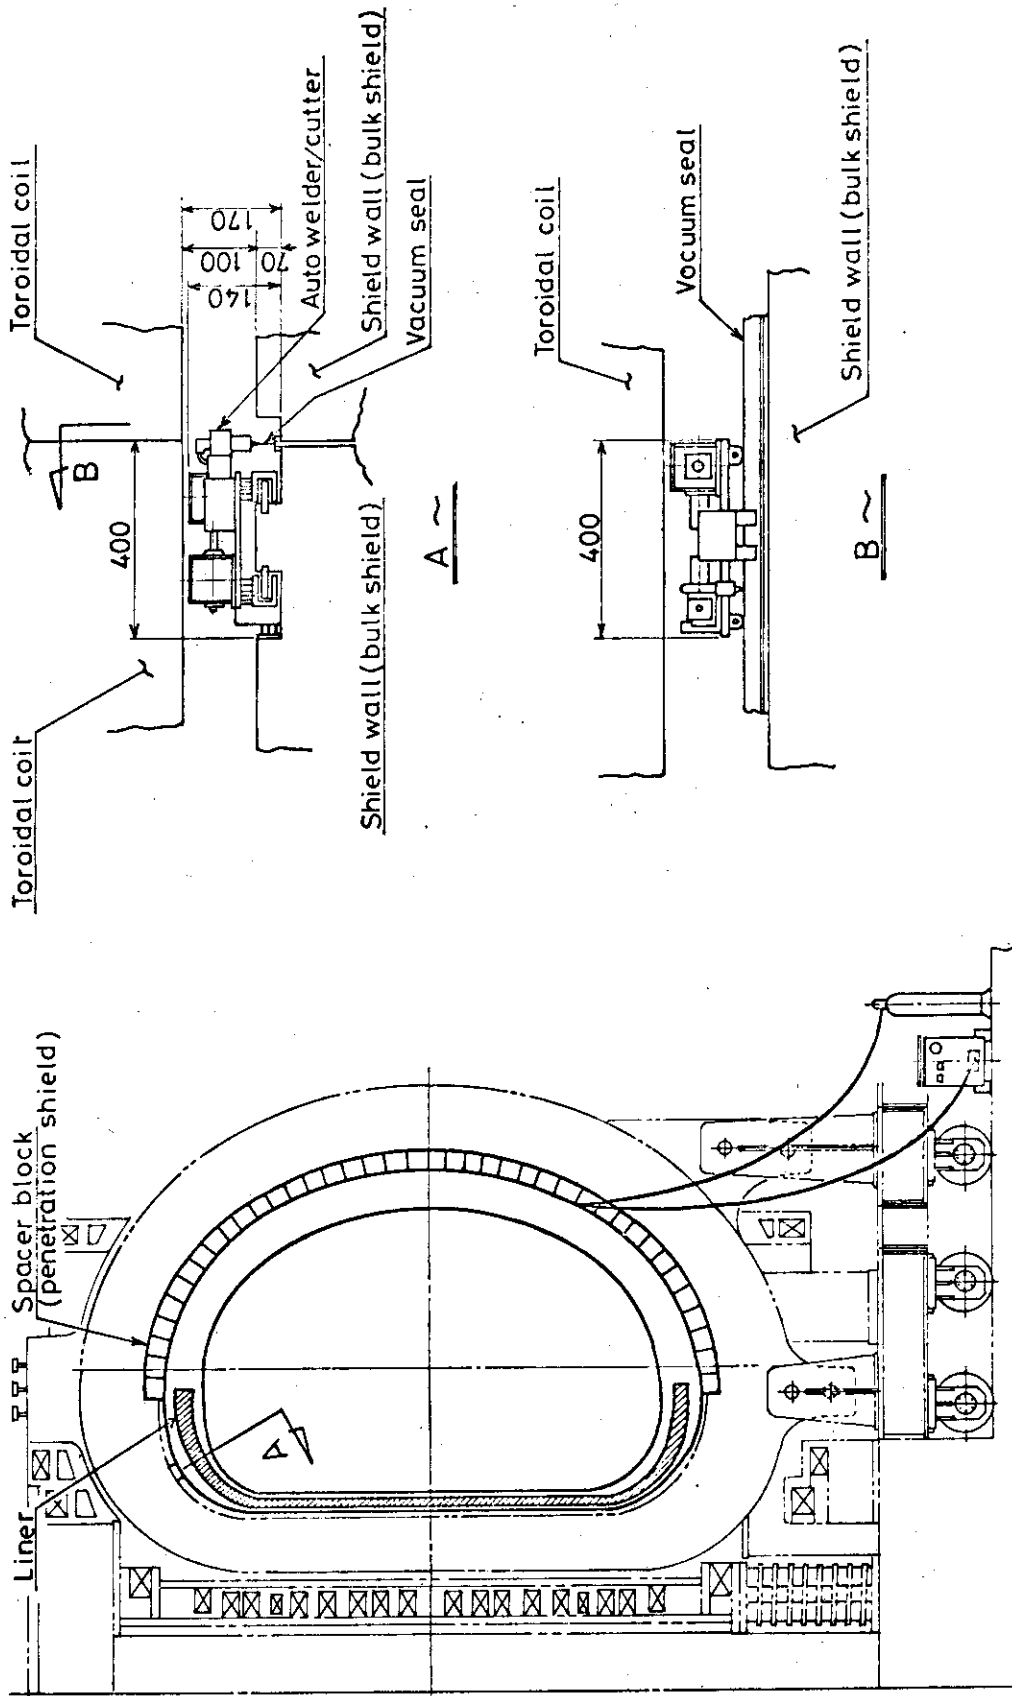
INSTALLING FOR AN AUTO WELDER/CUTTER
